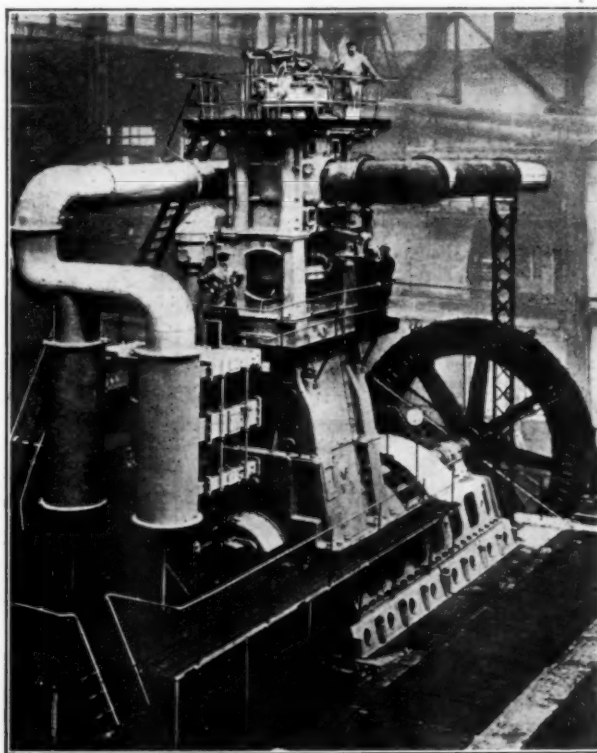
SINGLE-CYLINDER, DOUBLE-ACTING KRUPP DIESEL ENGINE, 1300 B.H.P. AT 84 R.P.M.
